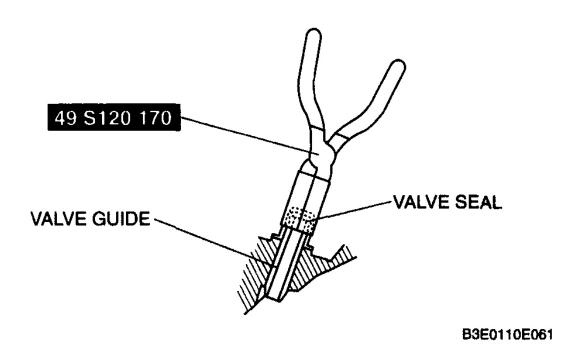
Removing Valve Seal Courtesy of MAZDA MOTORS CORP.
